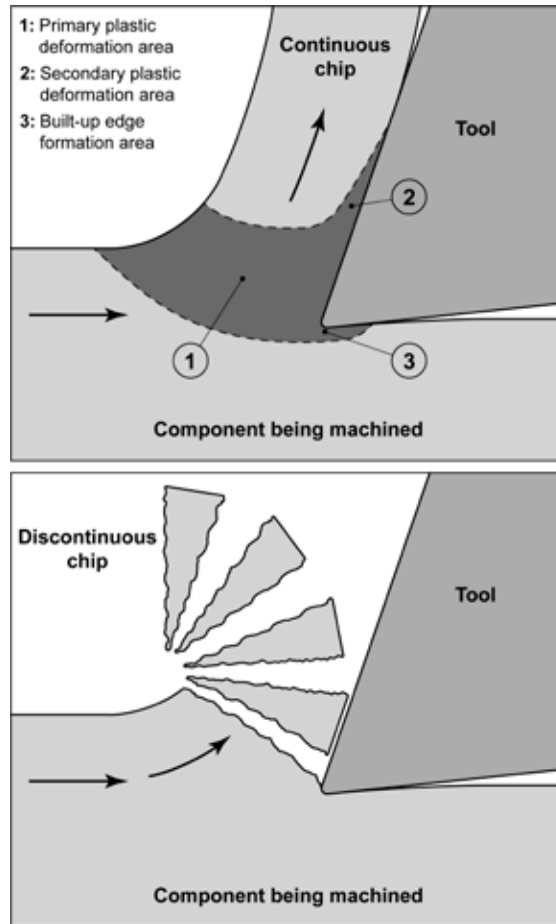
Chip formation upon tool contact with the part: (a) continuous chip; (b) discontinuous fragmented chip.
